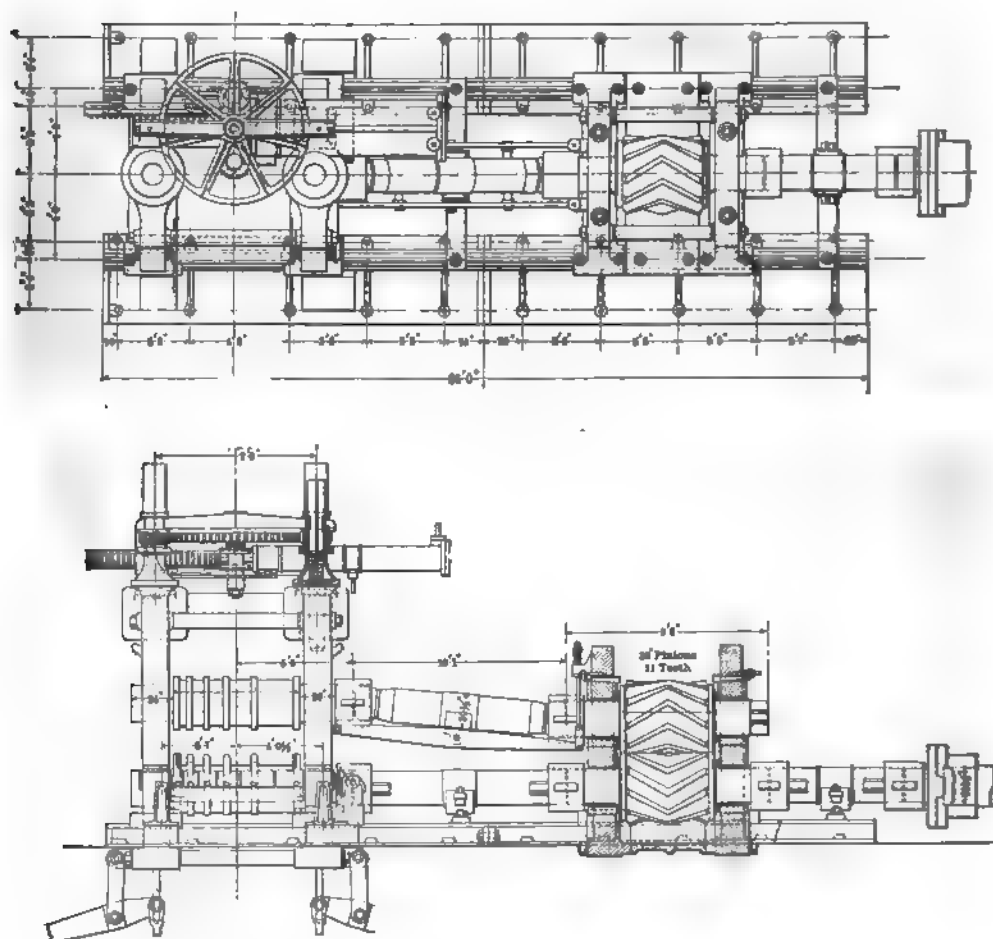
PLAN AND ELEVATION OF 38-IN. LLOYD-BOOTH BLOOMING MILL AT SHARON.
